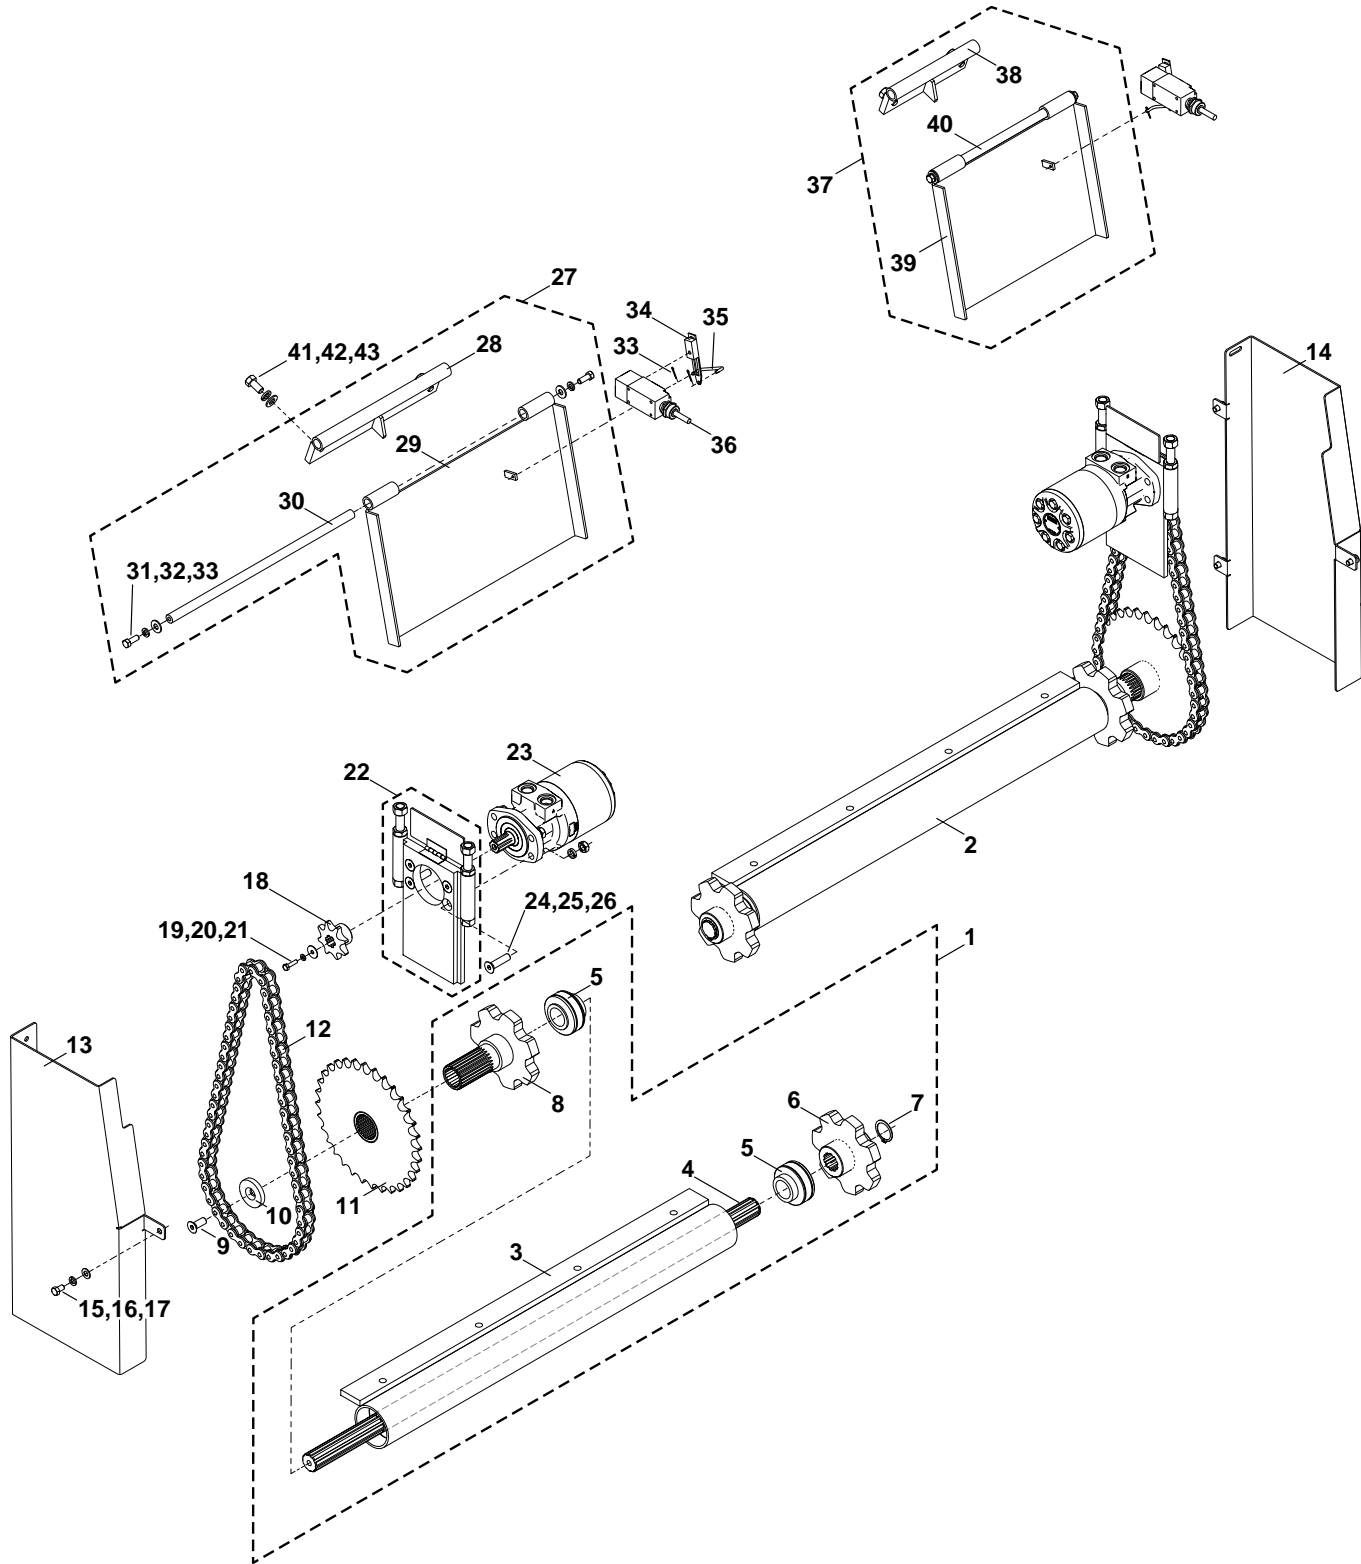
Conveyor Drive & Paddle Assembly (2 of 2)
